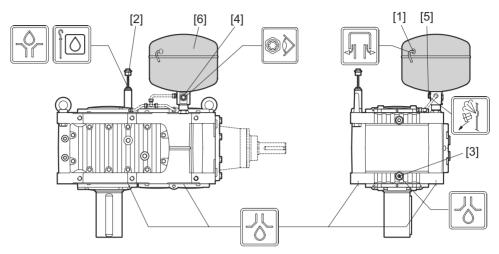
MC.PV../MC.RV.. industrial gear unit with steel oil expansion tank
